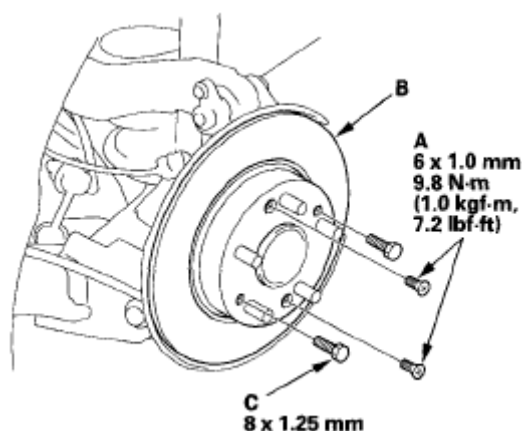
Identifying Brake Disc Retaining Screws (With Torque Specifications)
